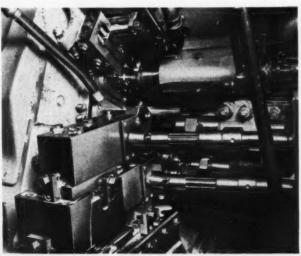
A view of the set-up for producing the component in Fig. 1. The number rolling and knurling attachments, which are accurately synchronized with the work spindles, are mounted one above the other on the first-position cross-slide
